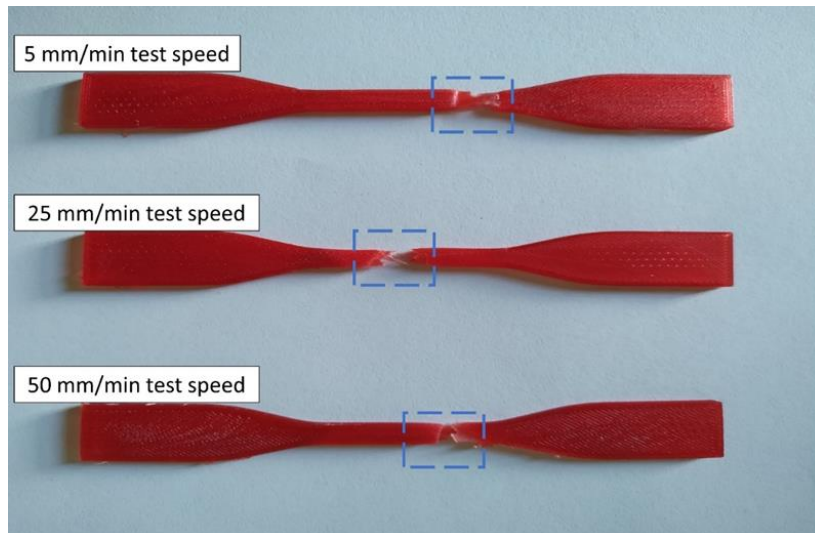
Macroscopic views of the deformed PETG samples having 0.1 mm layer thickness
